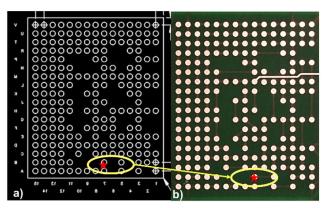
a) Live bug view of BGAs on WLCSP TV; b) Flat section showing failed BGA for UF3.
